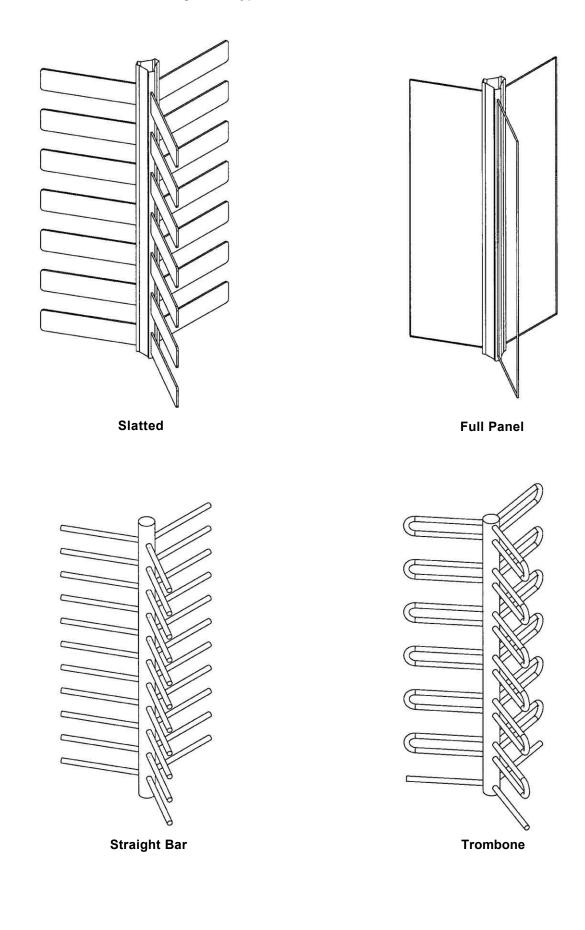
Typical 120 $^{\circ}$ Rotor Assemblies
